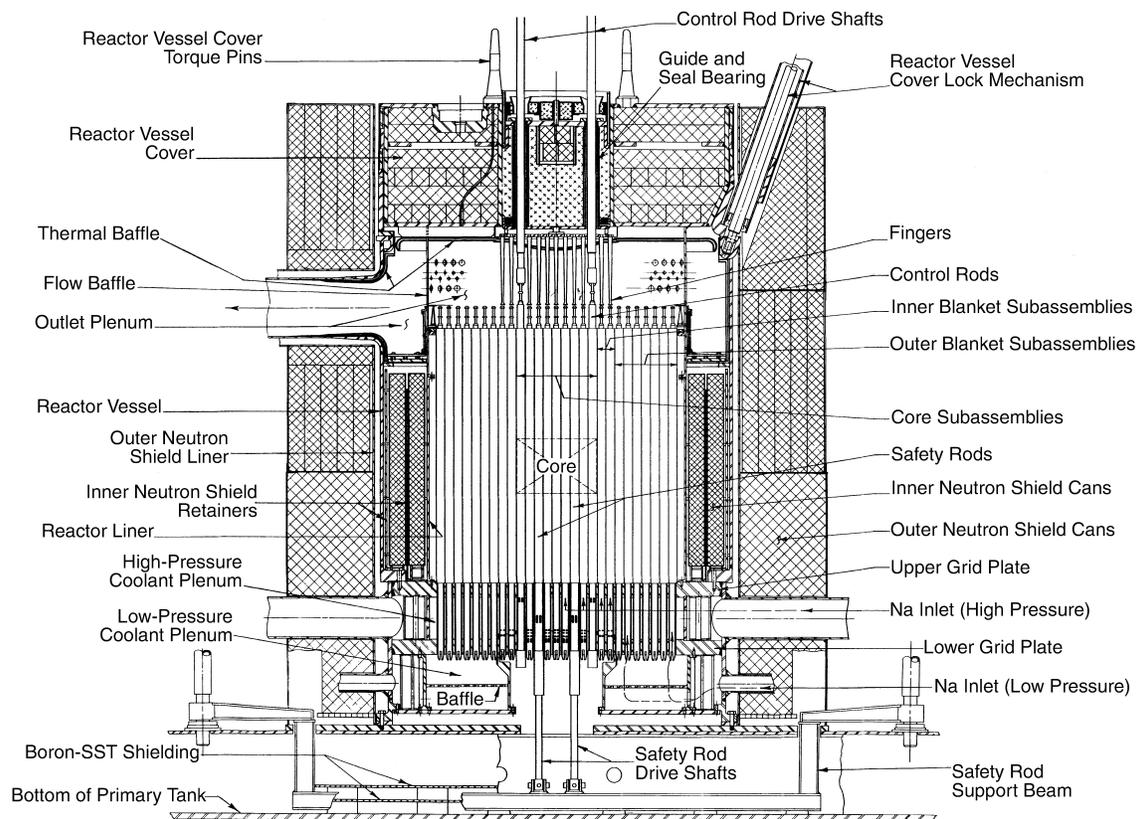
REACTOR VESSEL ASSEMBLY.
